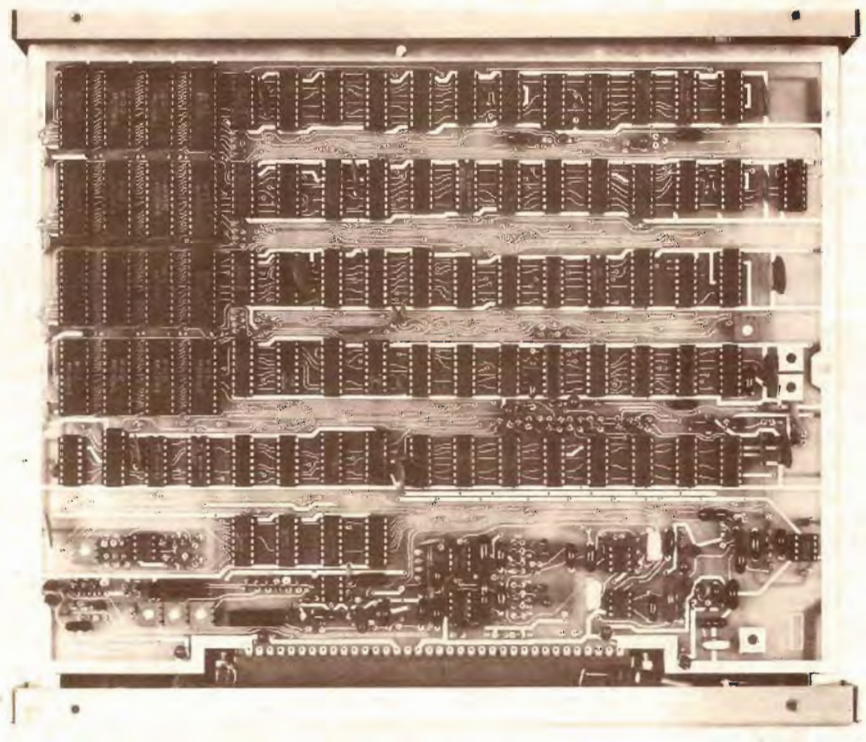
THIS PHOTO shows how the main board should look when it is correctly assembled. It is shown here mounted in the enclosure.
